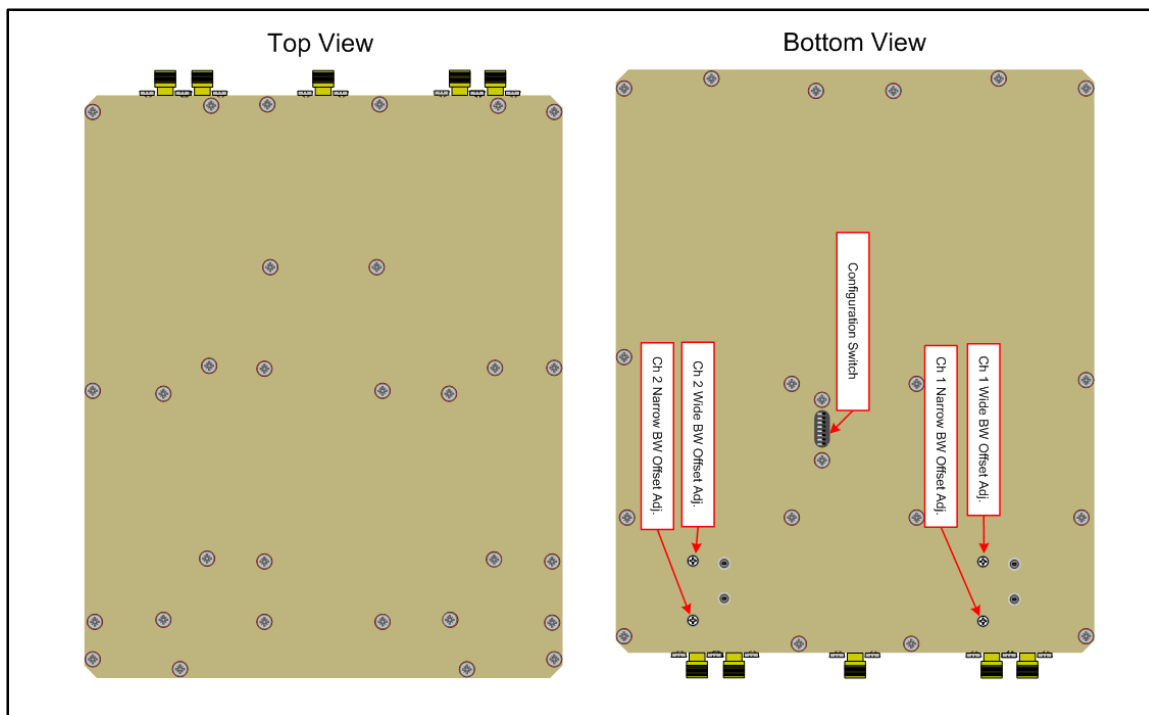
A LS27B Mechanical Outline Drawing – Top and Bottom
